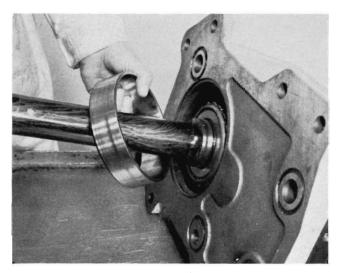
Install turbine shaft inner bearing cup on bearing cone.
